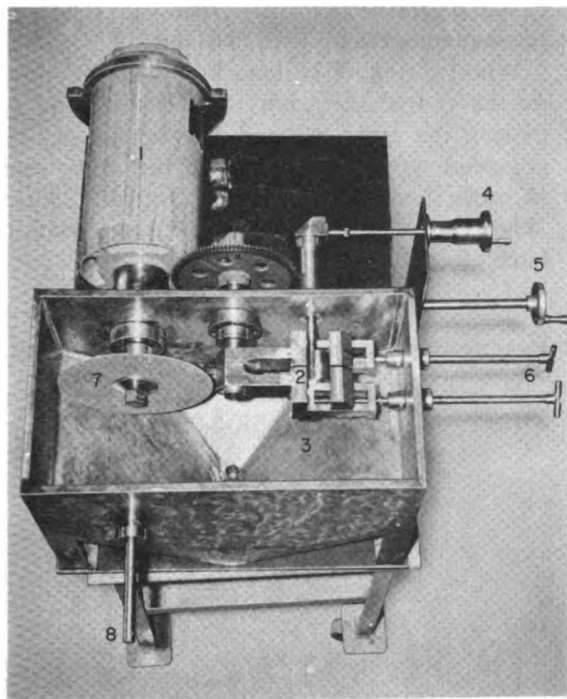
Abrasive cutoff machine with box lid removed. 1, 2-hp 1800-rpm motorized grinding spindle; 2, double vise; 3, stainless-steel box; 4, micrometer thickness gauge; 5, feeding crank; 6, vise adjusting rods; 7, arbor and abrasive wheel; 8, arbor wrench.
